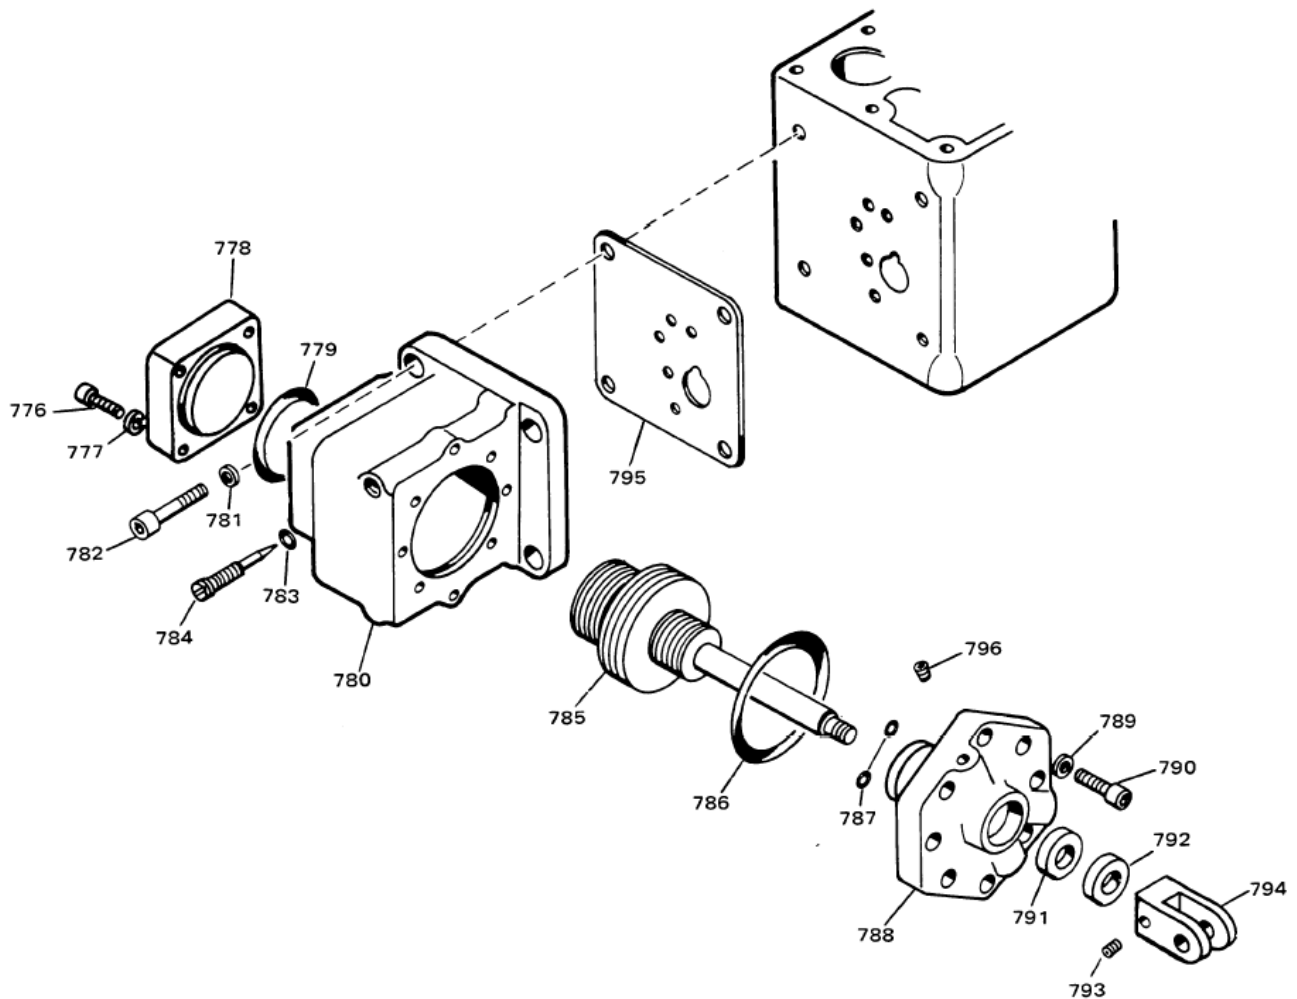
Exploded View of 29 ft-lb (39 J) Power Cylinder (Pull)
